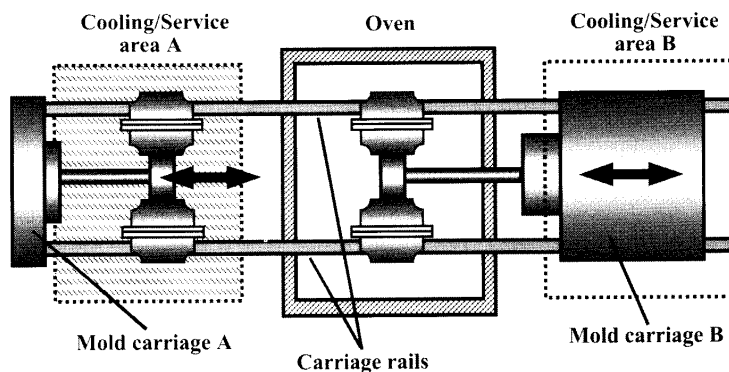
Shuttle rotational molding machine (Crawford and Throne, 2002)
